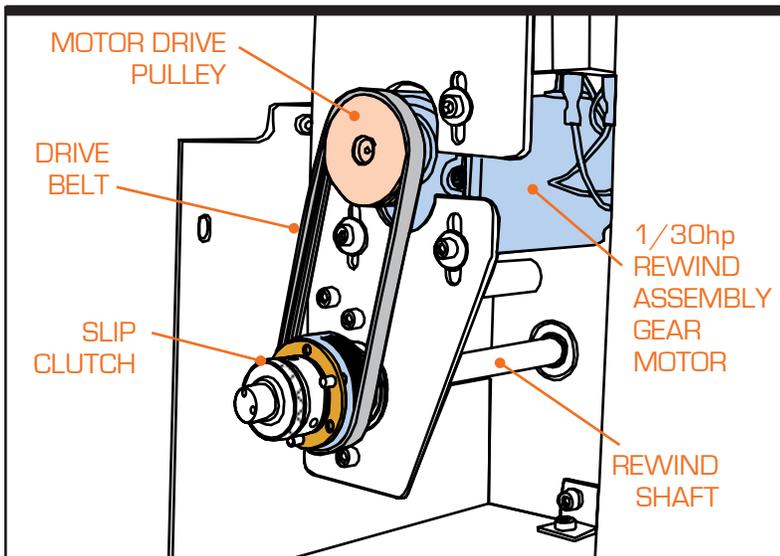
Clutch Assembly for Rewind Assembly (Rear of Labeler)
